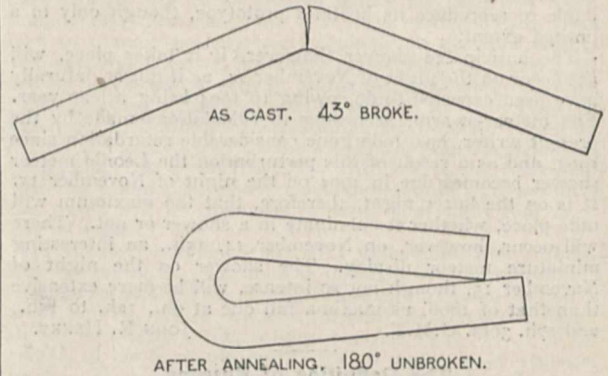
Dimensions of test-pieces:— $10'' \times \frac{3}{4}''$ diam.; bending radius, " $\frac{1}{2}$ ".
